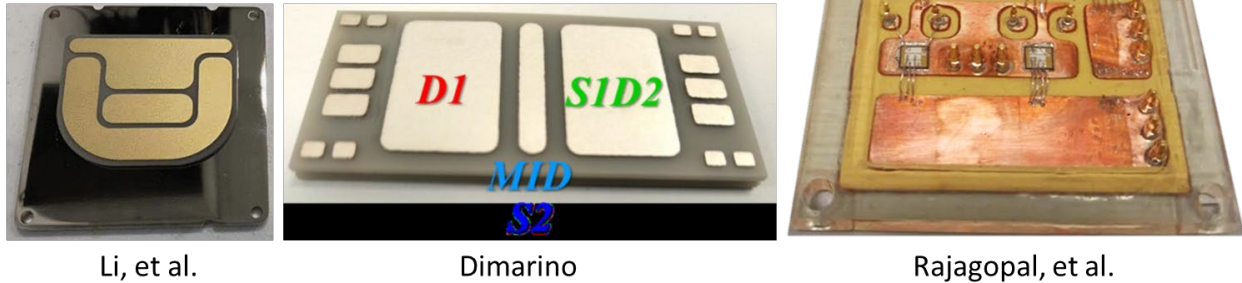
Examples of fillets used in power module layouts [5], [79], [84].
